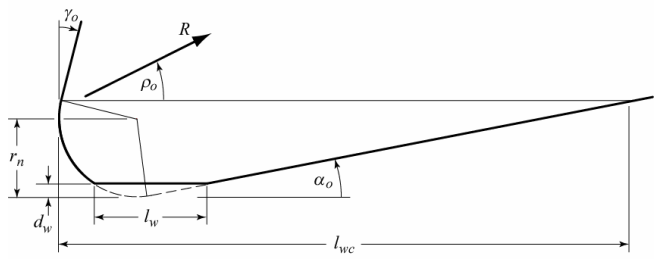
Geometry of an edge-radiused tool with a flank wear land
